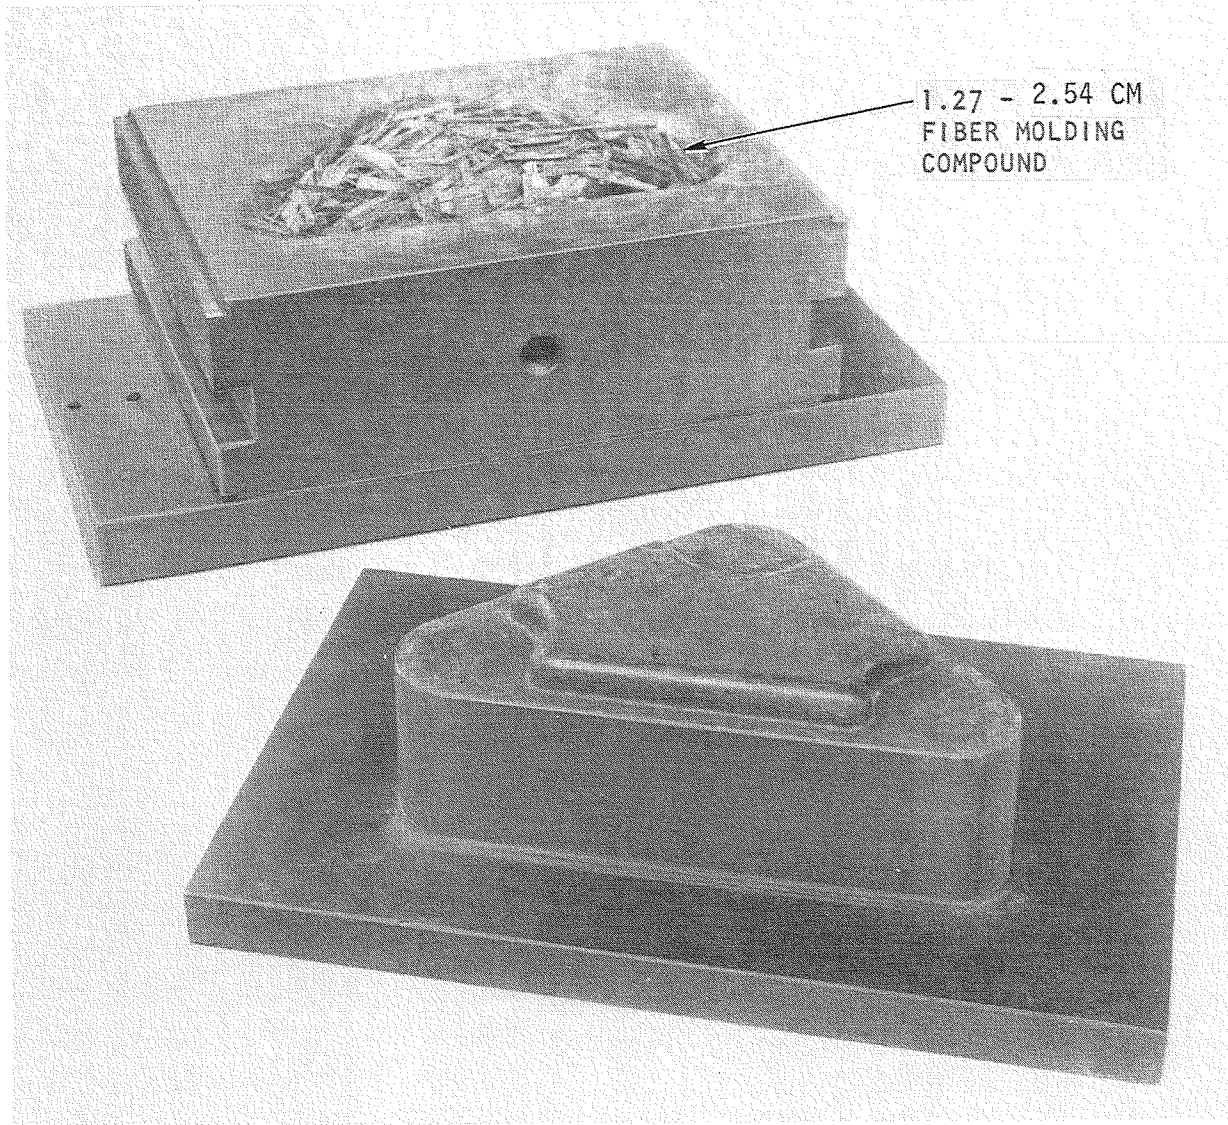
Celion/LARC 160 Molding Compound Complex Part Demonstration Mold
